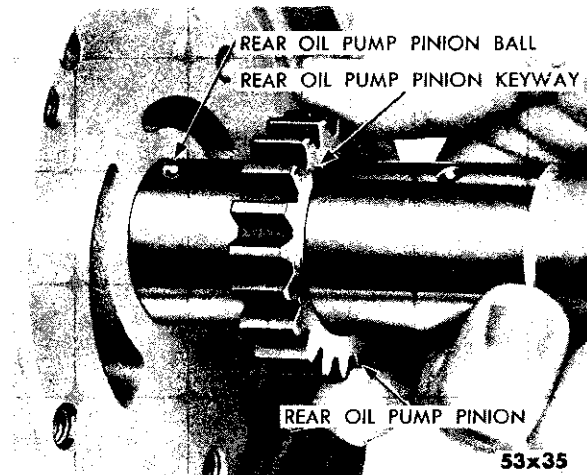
Removal and Installation of Rear Oil Pump Pinion
